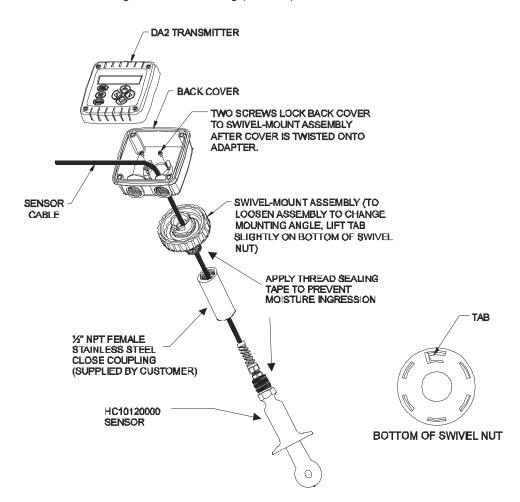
illustrates how to integrally mount the transmitter onto a sensor using the supplied mounting hardware kit.
